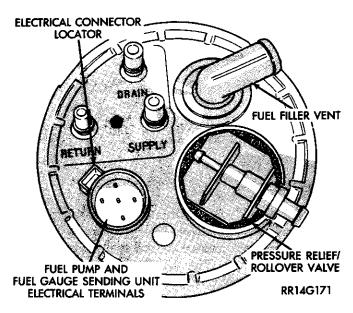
Top View of Fuel Pump Module REMOVAL
